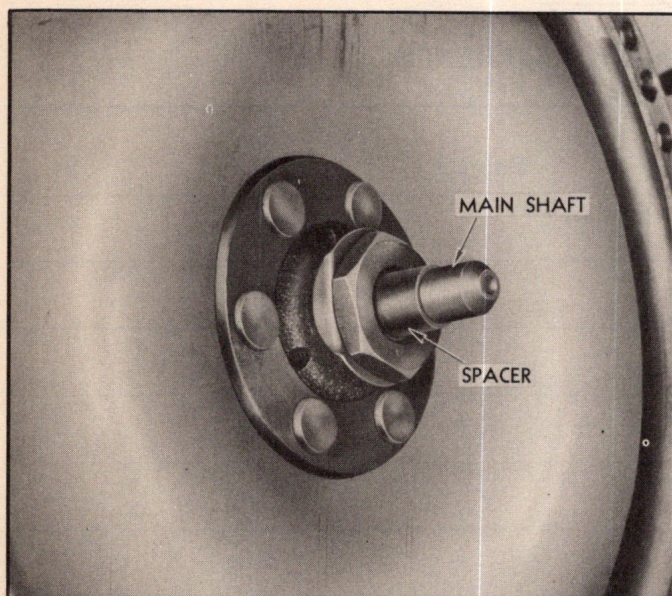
Pilot Bearing Spacer on End of Main Shaft
